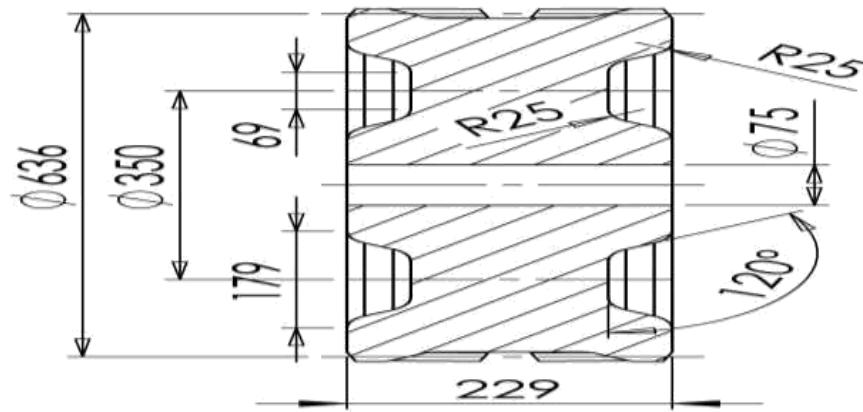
Cut-Section of Gear with Groove and Taper Edges Module 10 Dia 636
